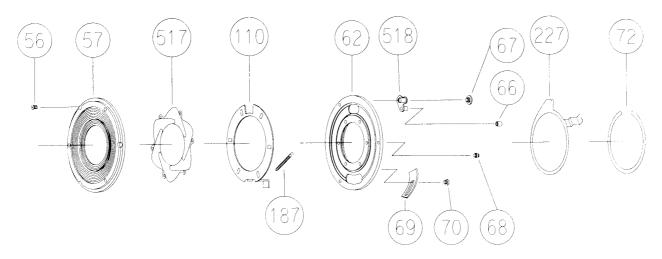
Yashica/Contax Diaphragm Housing Assembly (Ref. 531)
